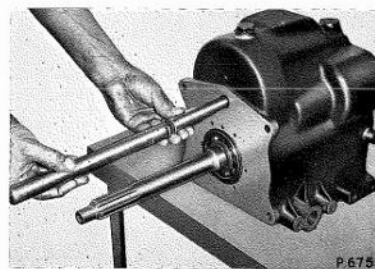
Refitting the layshaft by first inserting the tapered shaft, Churchill Tool R.G.78, to assist in aligning the thrust washers and collars.
